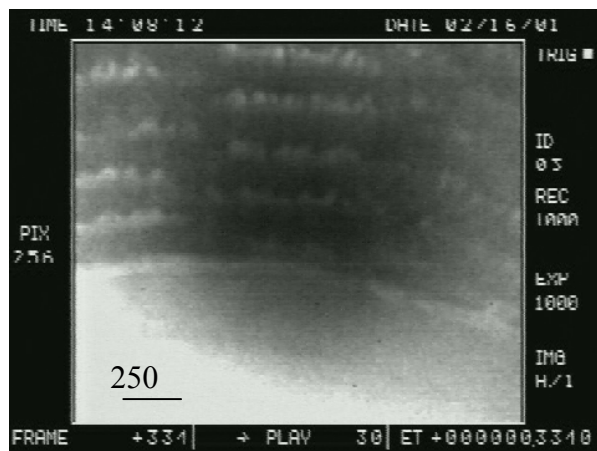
Weld ripples at the trailing edge of a GTA weld in 304 stainless steel.
